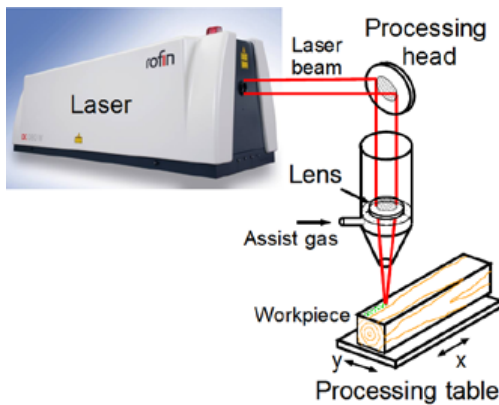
LASER PROCESSING MACHINE FOR INCISING WITH SLAB CO₂ LASER.
